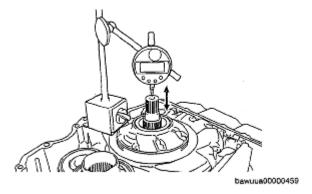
Inspecting Input Shaft Turns Smoothly Courtesy of MAZDA MOTORS CORP.
